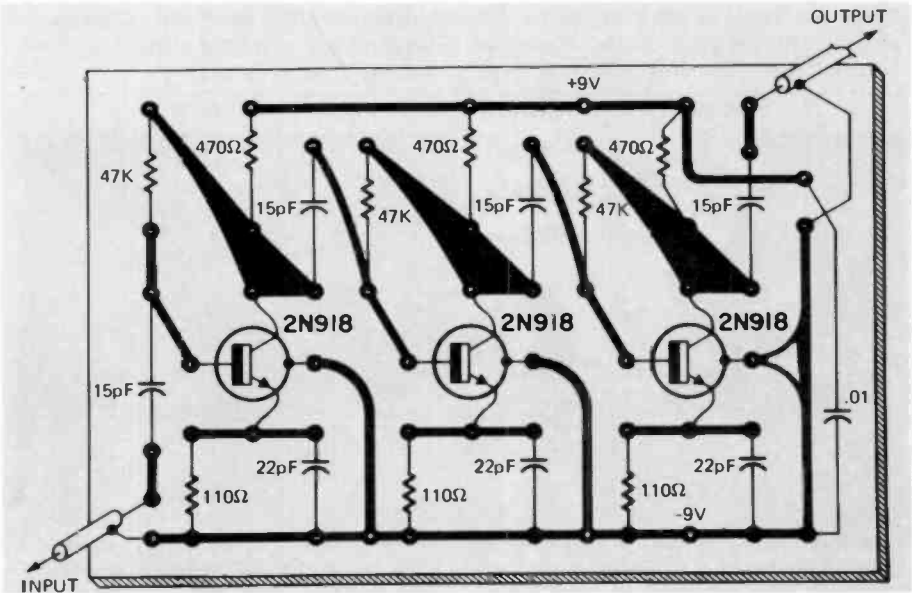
PARTS ARE ASSEMBLED ON A BOARD approximately $2\frac{1}{4}$ by $2\frac{1}{4}$ inches. The circuit is easy to duplicate using perforated board and clips or etched and drilled PC board.
